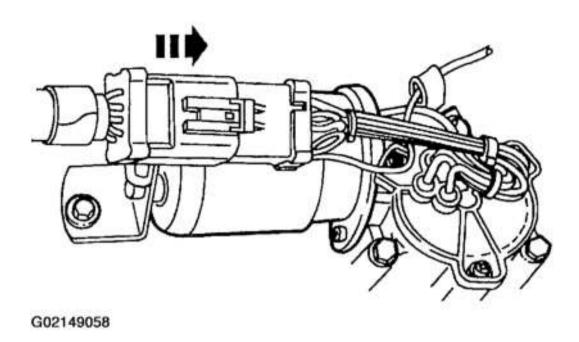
Connecting Electric Shift Motor Electrical Connector
